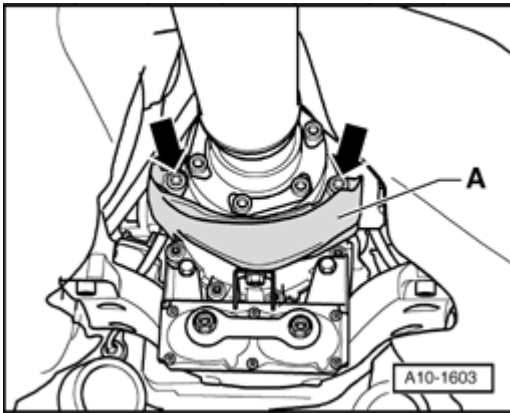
Removing/Installing Heat Shield For Driveshaft
